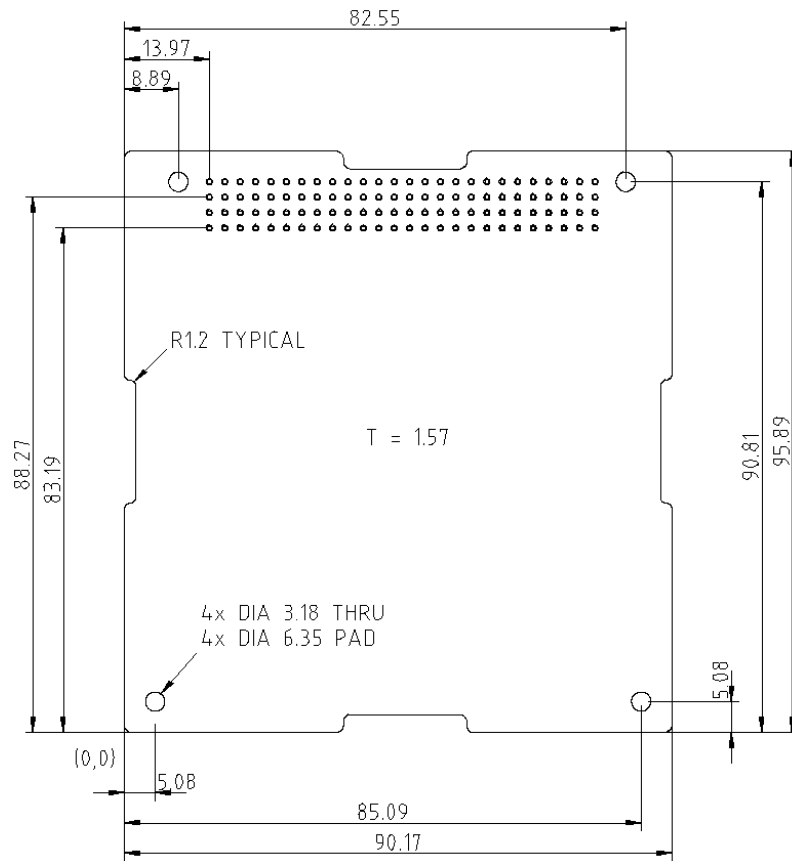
LibreCube mechanical drawing (dimensions in mm)
